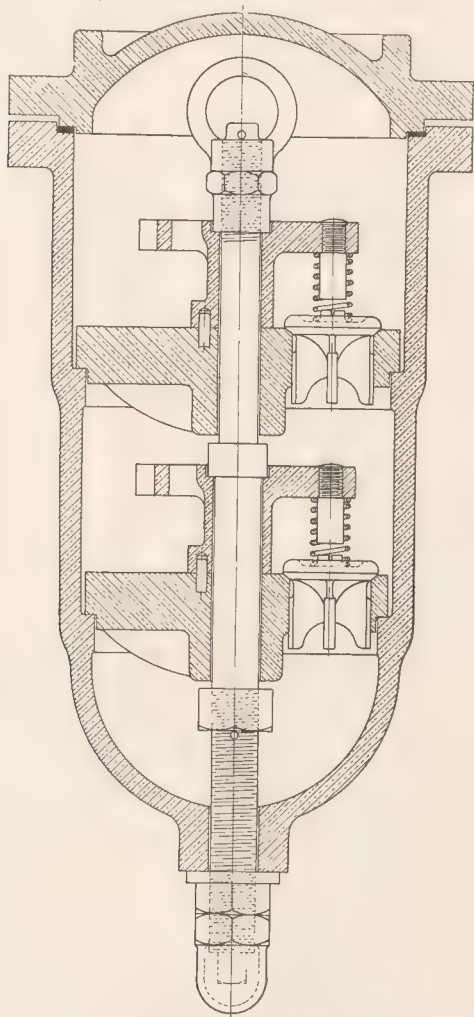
Blake & Knowles Feed Pump Valve Arrangement.
